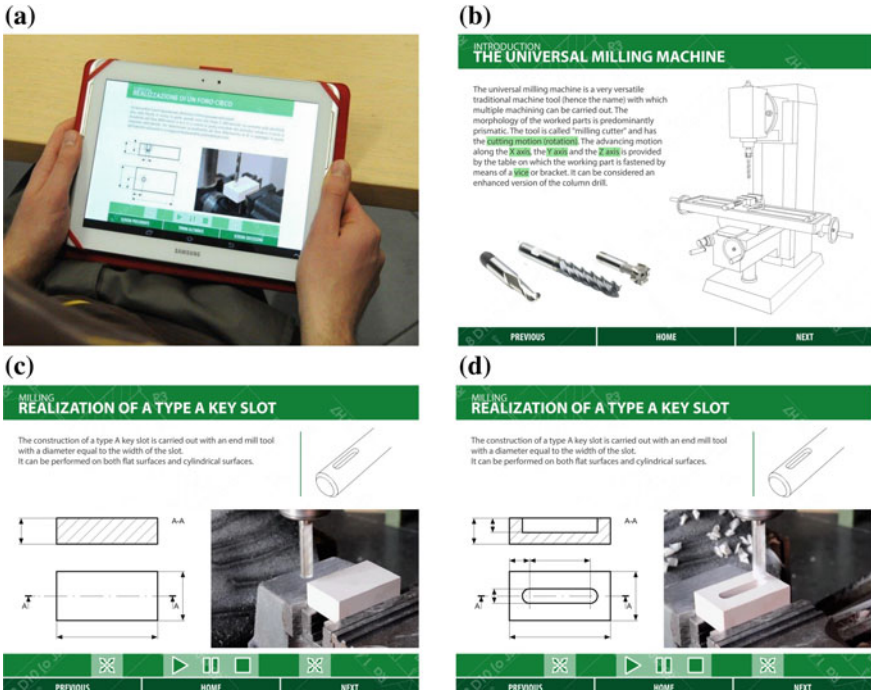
Interactive application for self-study of technical drawing and mechanical machining fundamentals. a The application. b The general description of the milling machine. c The initial phase of a milling. d The final phase of a milling
